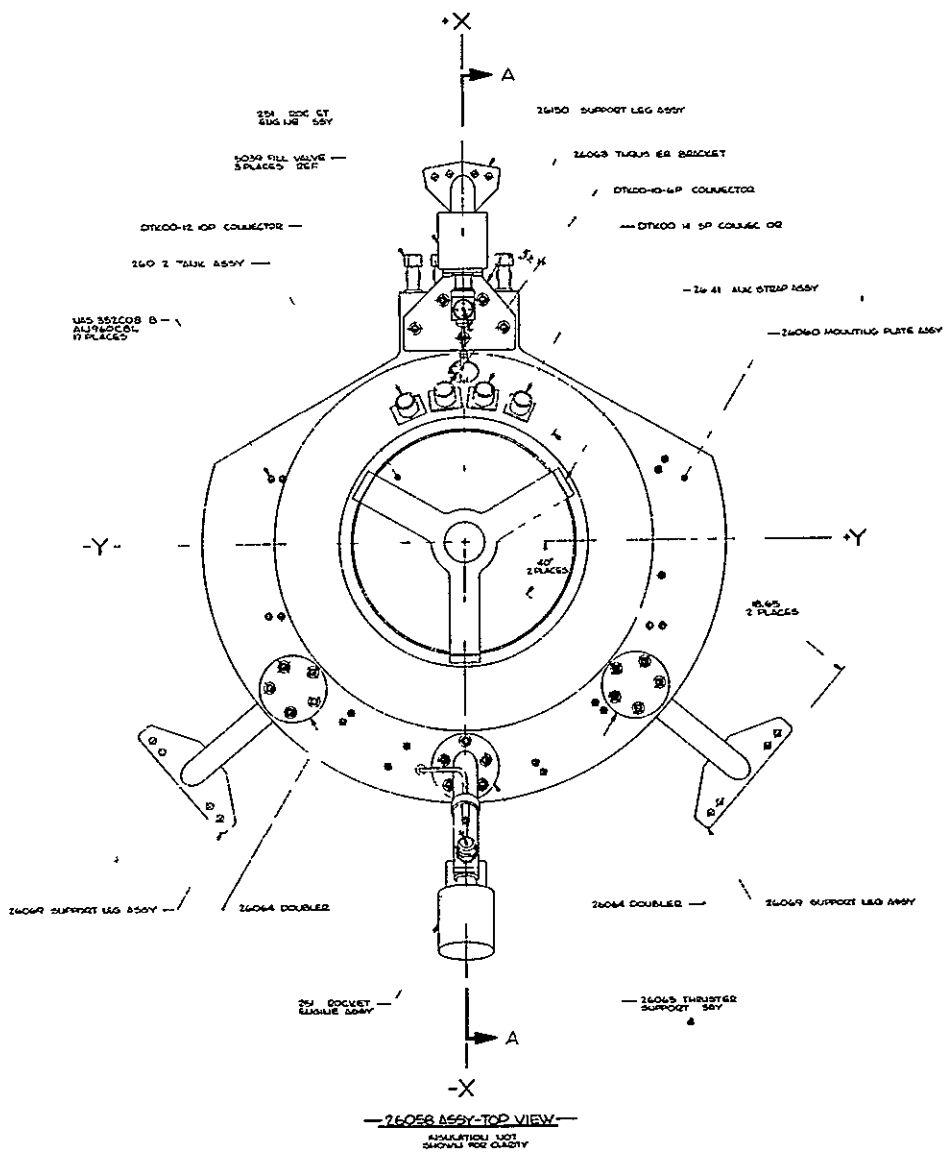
Orbit Adjust Subsystem - Assembled Top View
